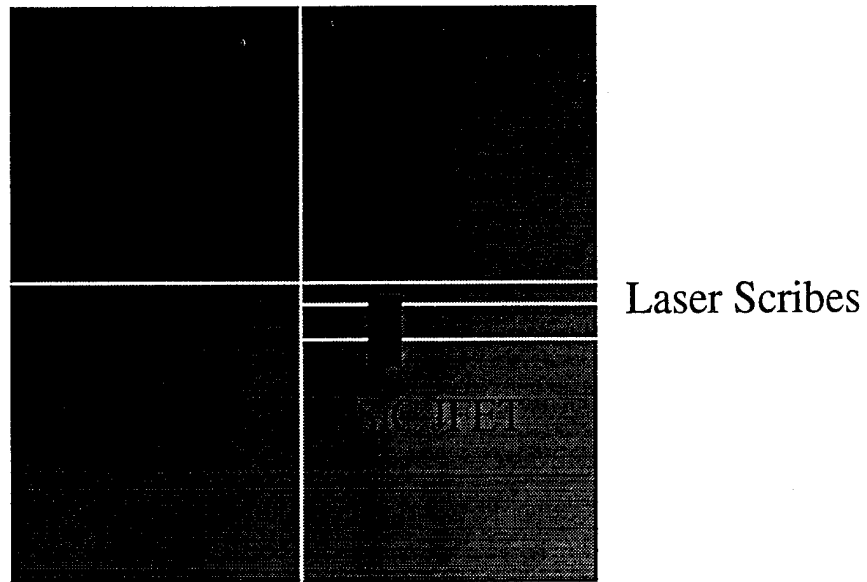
Moly coated glass with scribe lines and JFET in place for welding.
